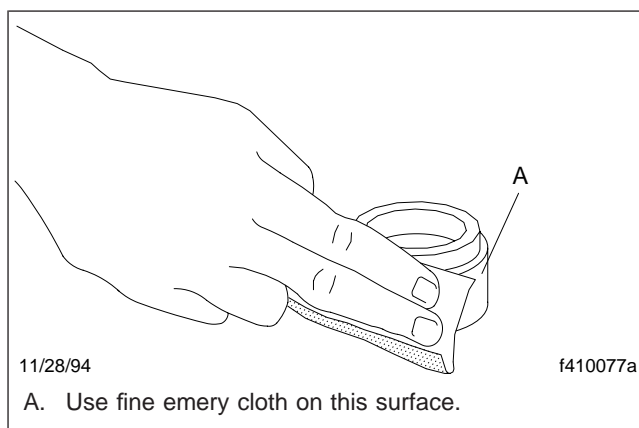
, Smoothing a Half-Round Yoke U-Joint Bearing Cup
